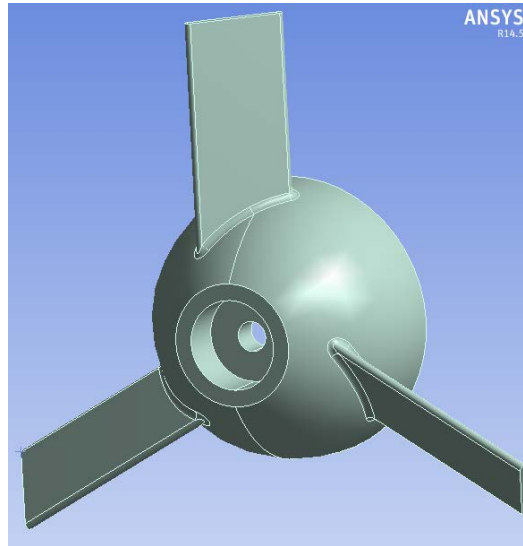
Baseline Impeller, a Representative Impeller Mechanical Model.
